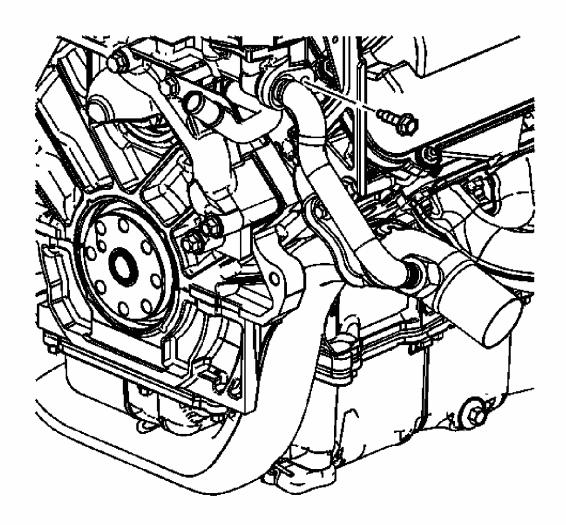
Identifying EGR Valve Inlet Pipe Courtesy of GENERAL MOTORS CORP.
